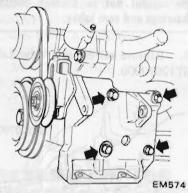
Removing idler pulley and compressor mounting bracket
